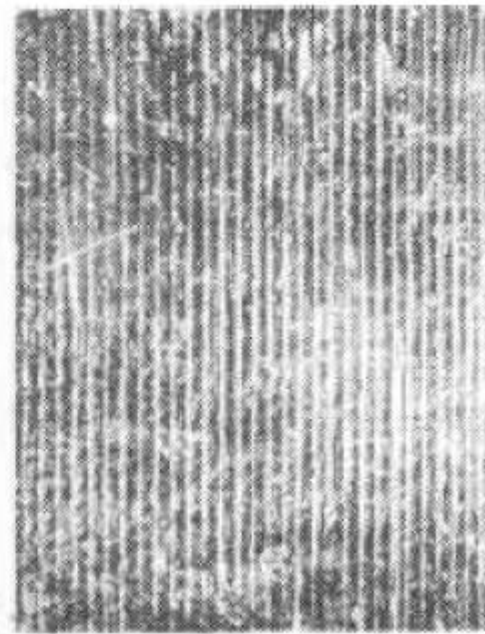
Underside of a chip that had seized to the face of the cutting tool in the light area along the cutting edge. Part of the built-up edge is shown in the process of passing off with the chip. Part of it was also being forced over the cutting edge of the tool and would eventually be deposited on the work surface.
